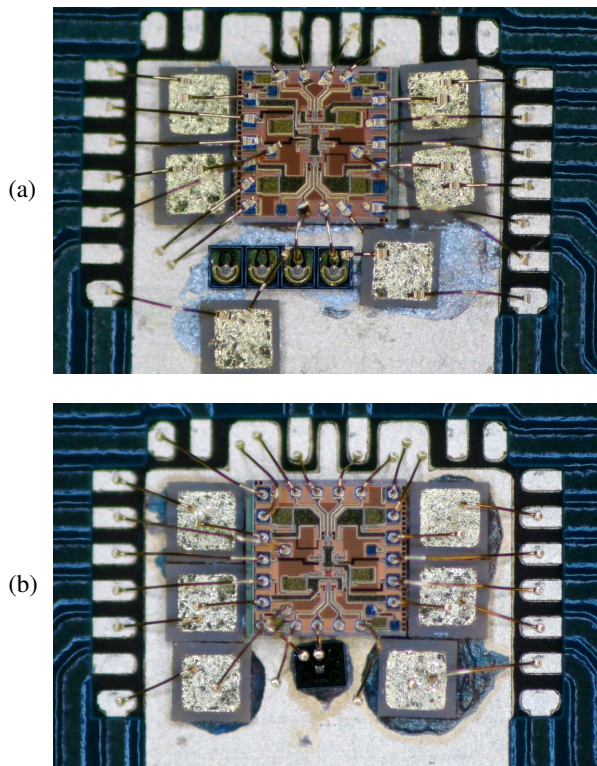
Example optoelectronic assemblies, zoomed to show wirebonding detail. (a) Transmitter assembly including copackaged electronic driver IC, VCSEL array, and surface mount decoupling capacitors. (b) Receiver assembly including copackaged electronic TIA, vertically incident photodiode, and surface mount decoupling capacitors.
